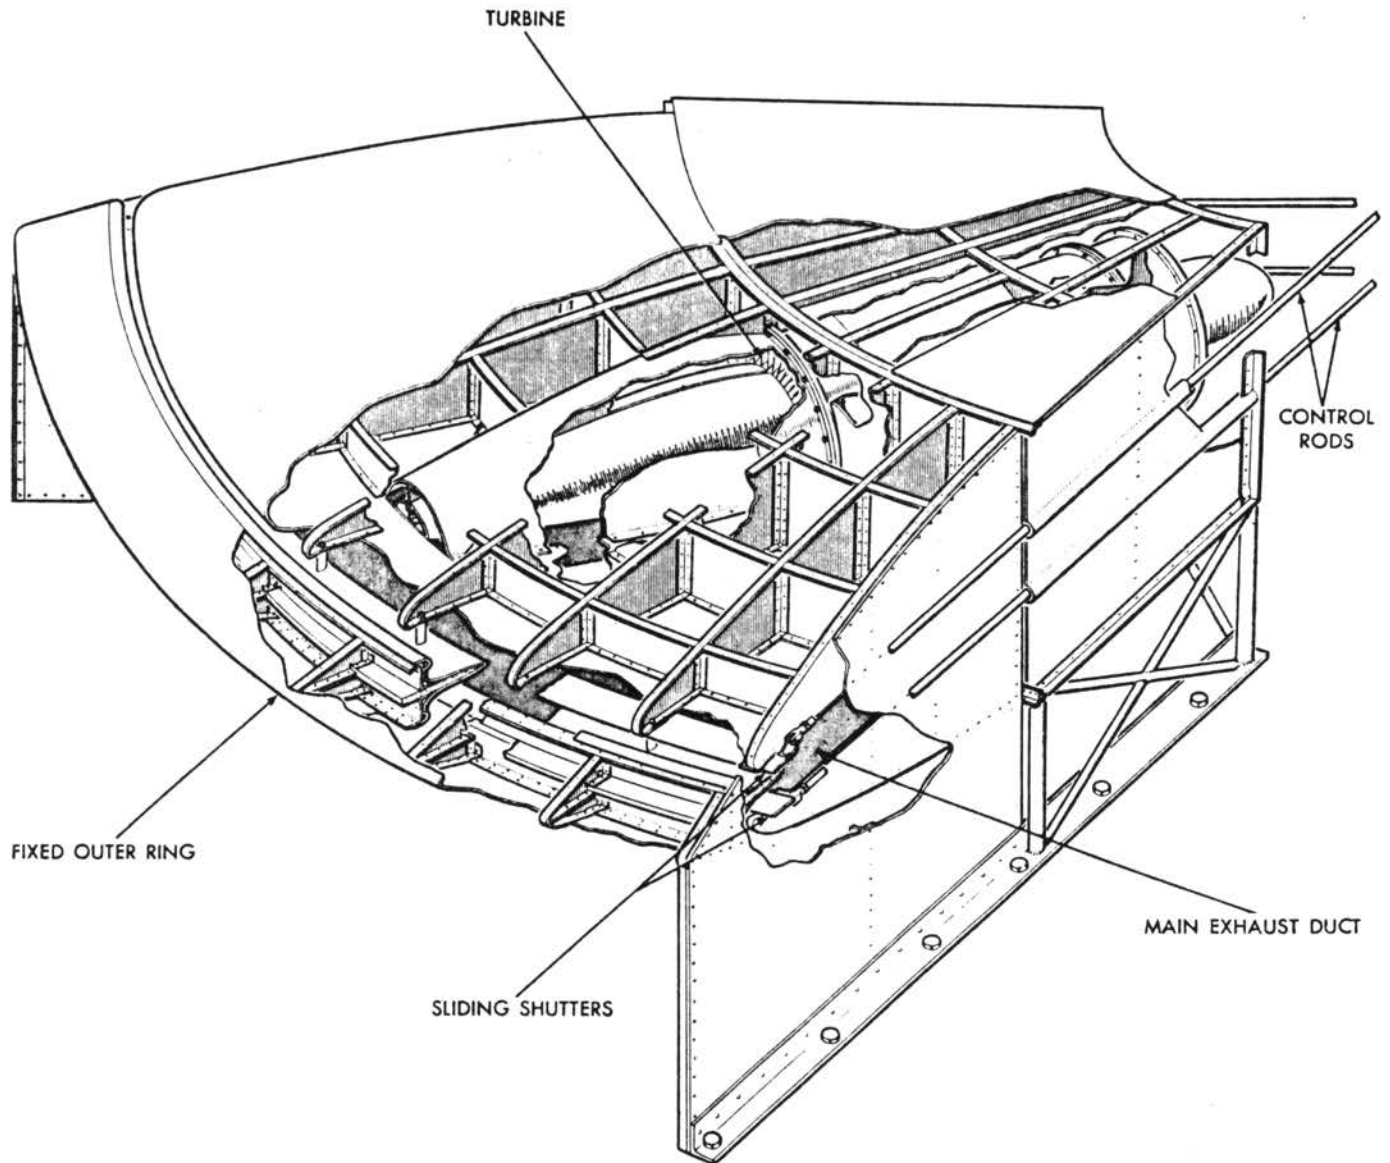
TEST SEGMENT WITH VIPER ENGINE
